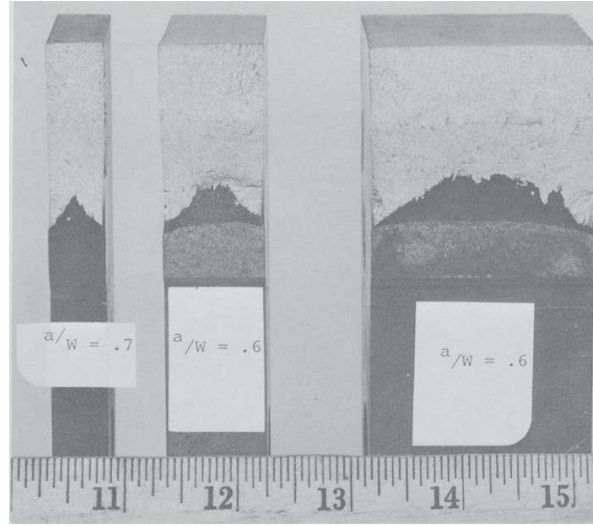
Fracture surfaces of CT specimens illustrating crack tunneling. From bottom to top: 1 - Fatigue crack; 2 - monotonic ductile crack propagation; 3 - brittle failure [Vassilaros et al., 1980]
